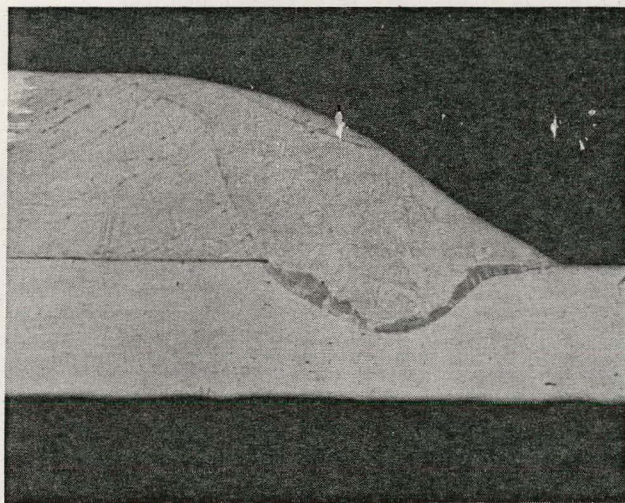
Crack-free weld - LOFT centerline stainless steel thermocouple.
